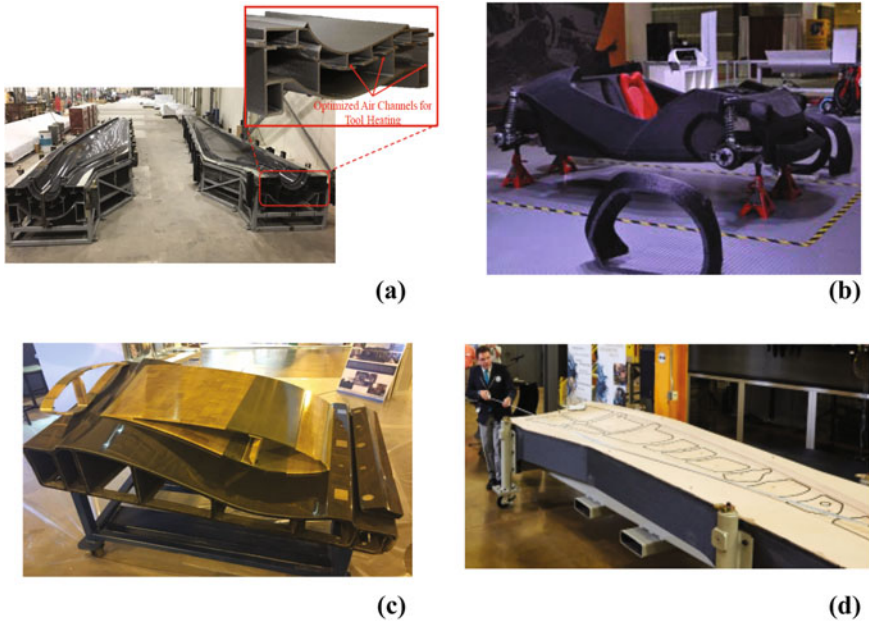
Applications of 3D printed composite structures via material extrusion additive manufacturing a molds for windmill blades [44], b car body [45], c mold [46], d large trim tool for composites [44]
